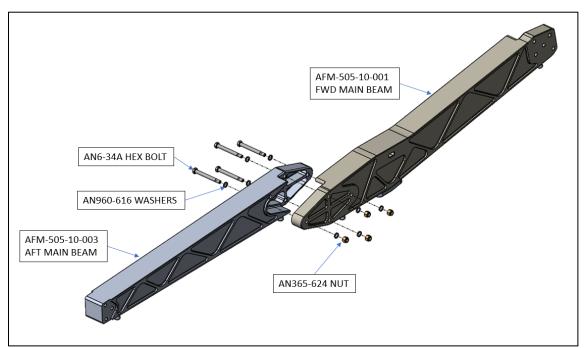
Assembly of the AFM-505-10-001 Fwd Main Beam to the AFM-505-10-003 Aft Main Beam.
